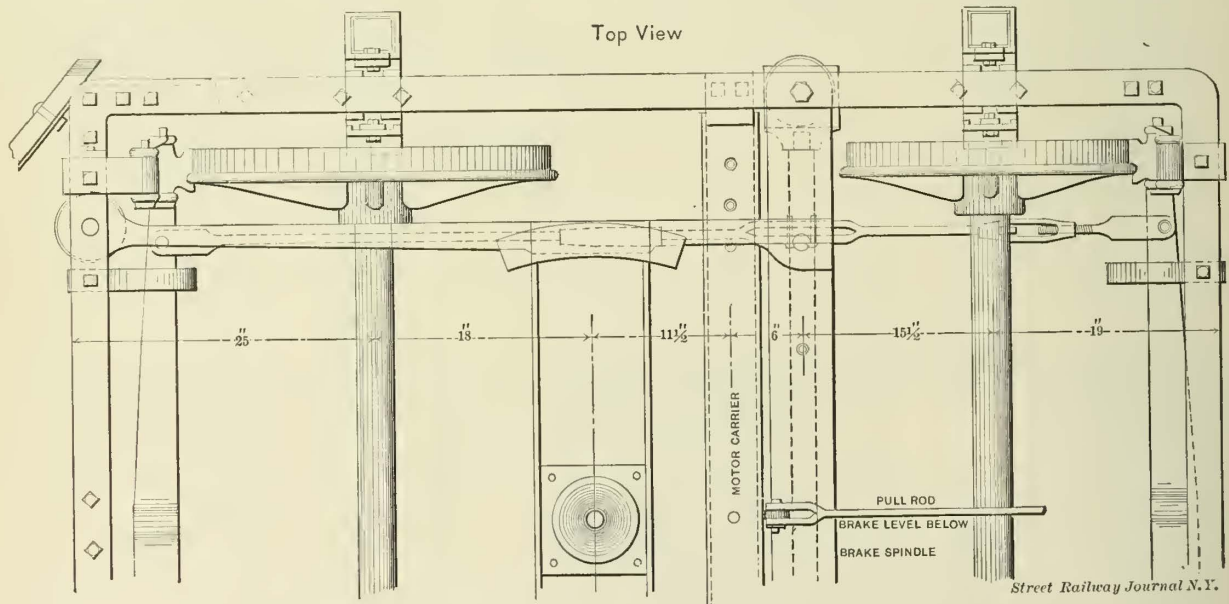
HALF PLAN—NEW MAXIMUM TRACTION TRUCK.
